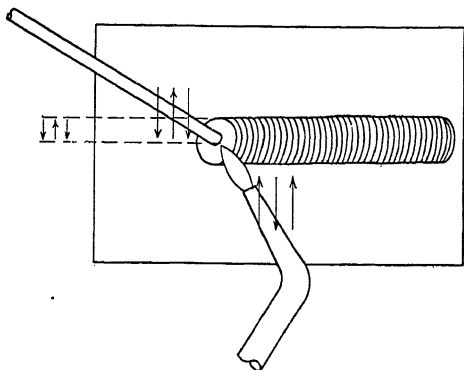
Position and movement of rod and torch in making a horizontal weld.
